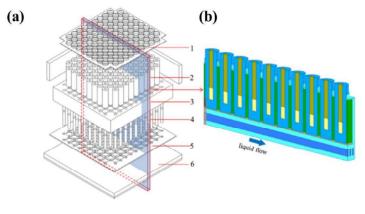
Battery module with conjugated cooling configuration: (a) overall system: (1) heat spreading plate, (2) battery, (3) PCM, (4) thermal column, (5) insulation layer, (6) cold plate assembly, and (b) battery module numerical model [209].
